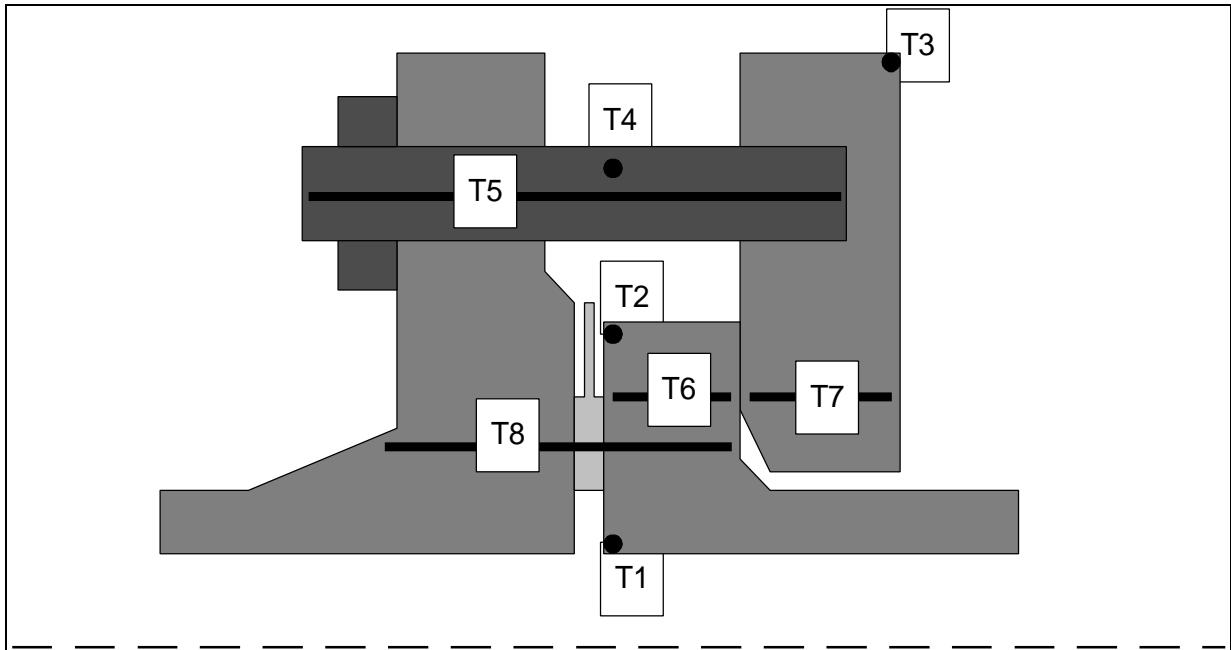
Nodal configuration of welded neck flange and lapped flange
